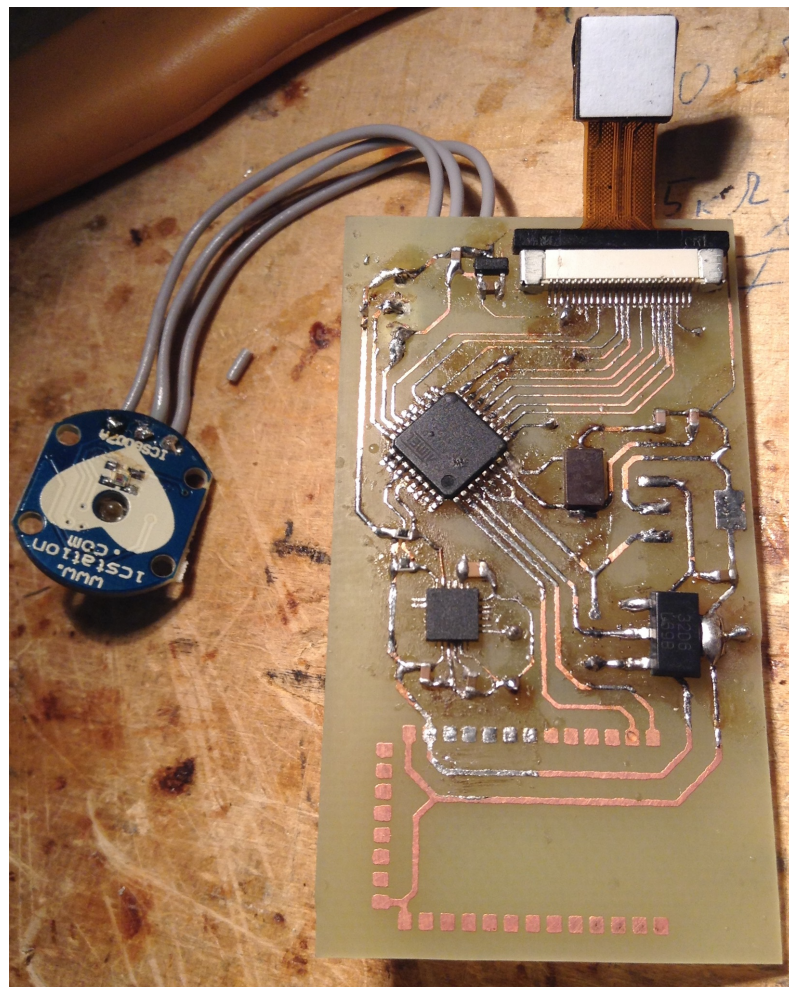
PCB board fabricated by the traditional method of photolithography with most of the components soldered.
